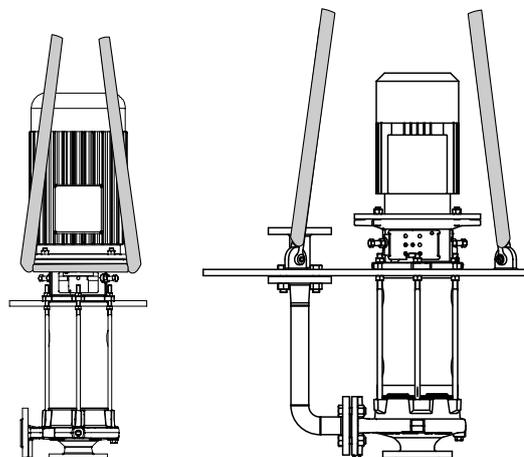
Transporting the pump set without/with cover plate up to motor size 160
